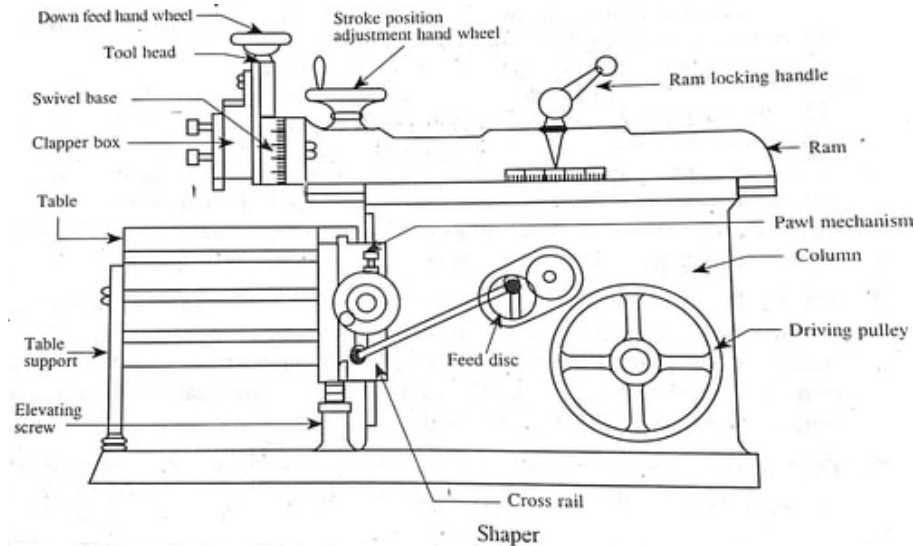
Representing the overview about Shaper Machine [Mechanical Magraj].
